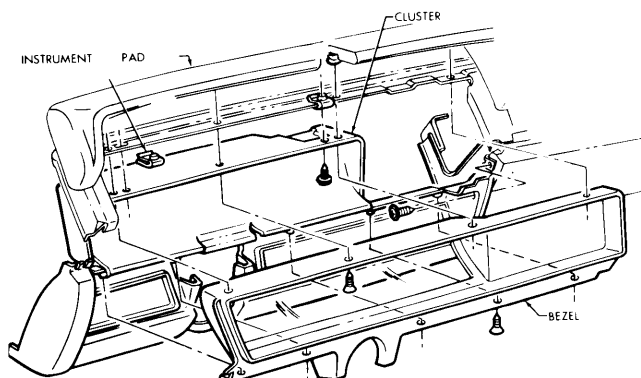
Exploded View of Standard One Piece Instrument Panel Cluster — Vega & Astre
